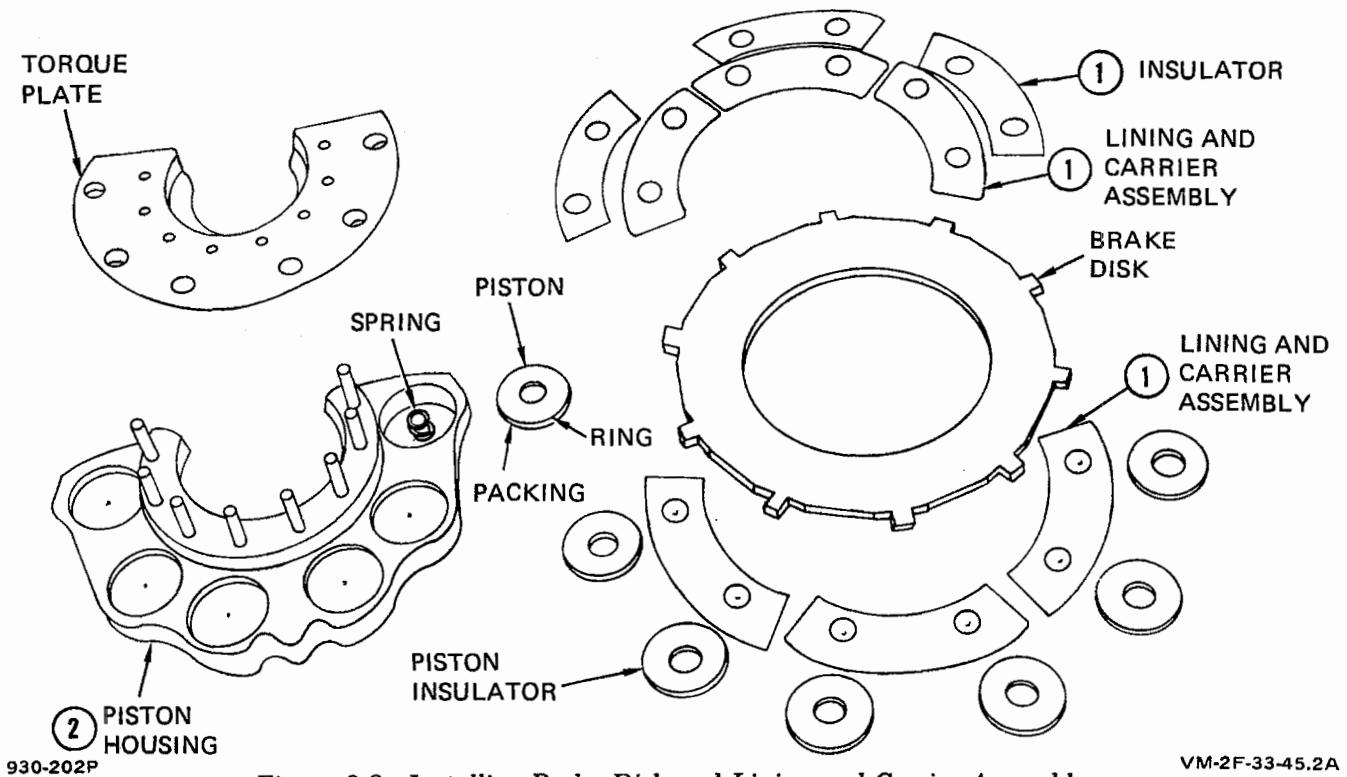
Installing Brake Disk and Lining-and-Carrier Assembly
